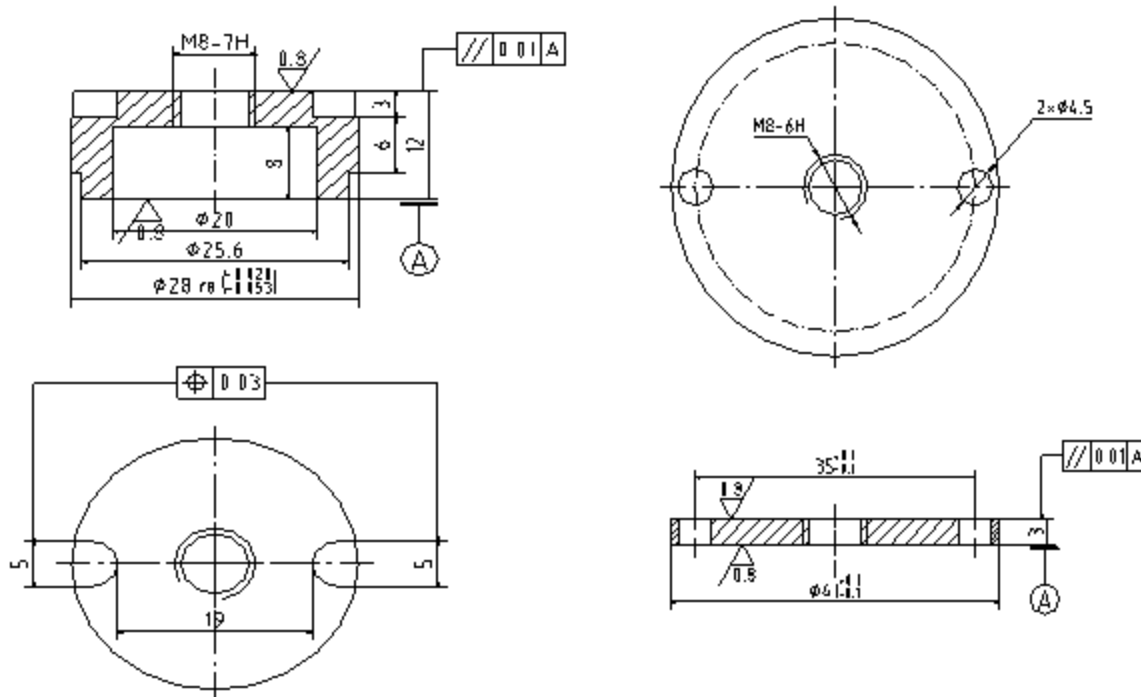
Dimensional drawing of the upper sample Fig. 7 Dimensional drawing of the lower sample
